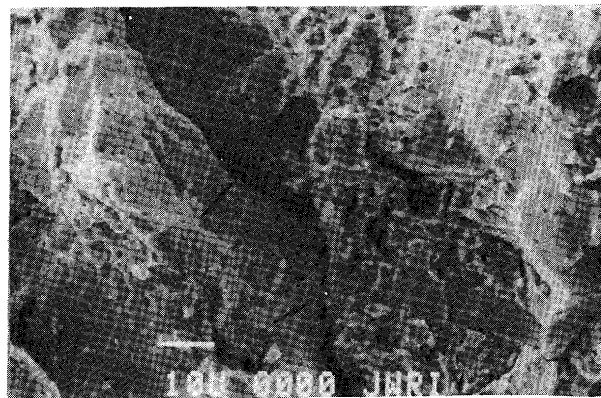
SEM fractograph of first layer of 11-2 specimen.
